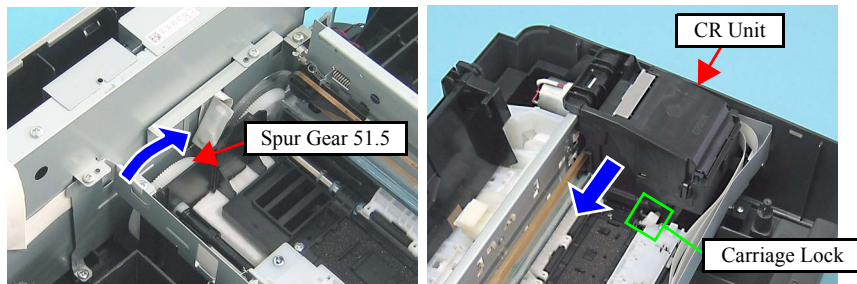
Unlocking the Carriage and Moving the CR Unit
